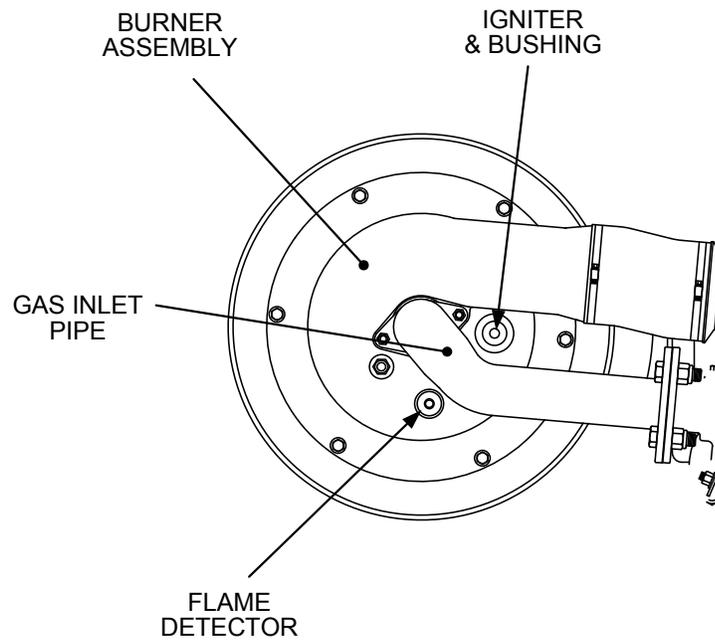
Burner Assembly Igniter & Flame Detector Locations
